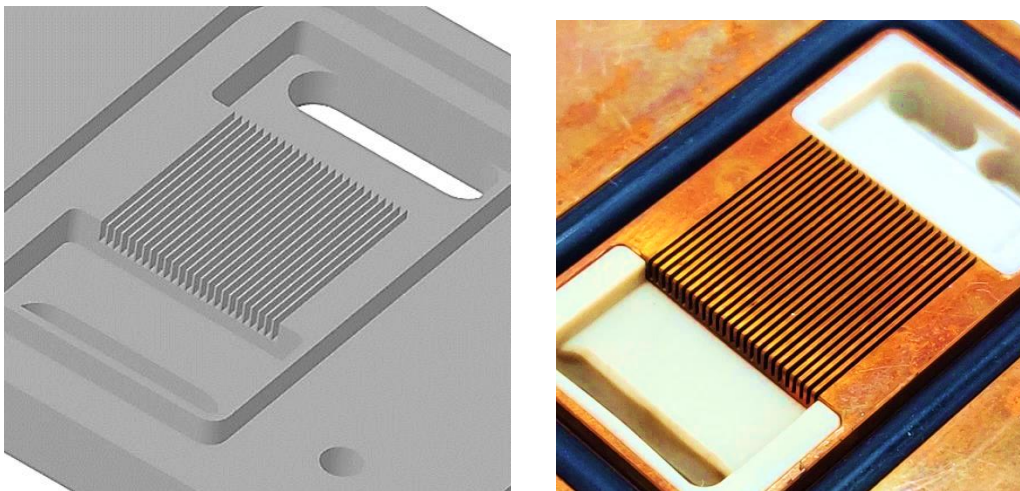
CAD model of the copper heat sink for geometry C (straight) on the left, and on the right the manufactured test sample.
